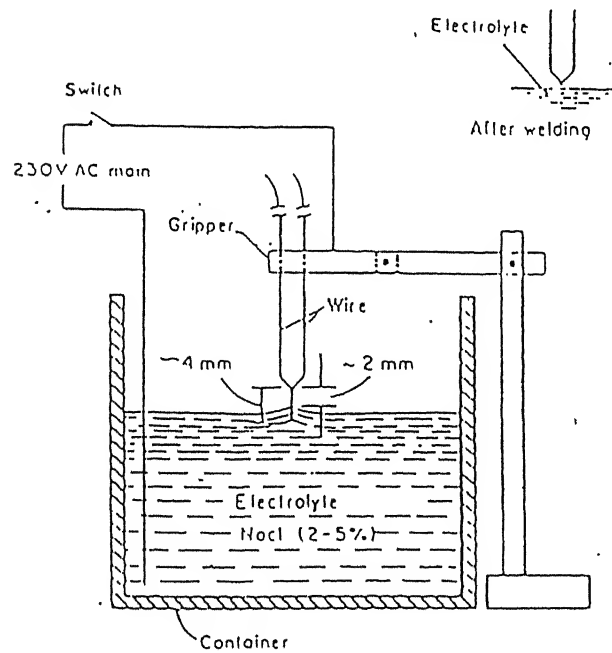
Micro welding of thermocouple using ECDM [4,5]
